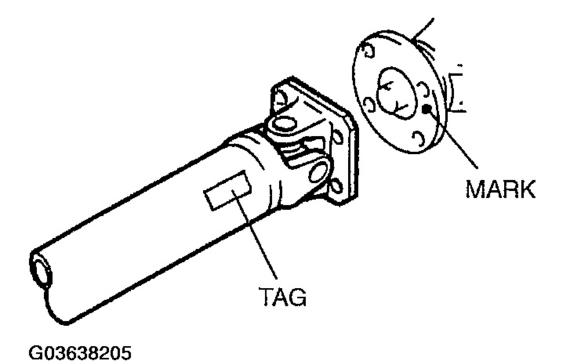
Aligning Marks Made During Removal, And Installing Propeller Shaft Courtesy of MAZDA MOTORS CORP.
